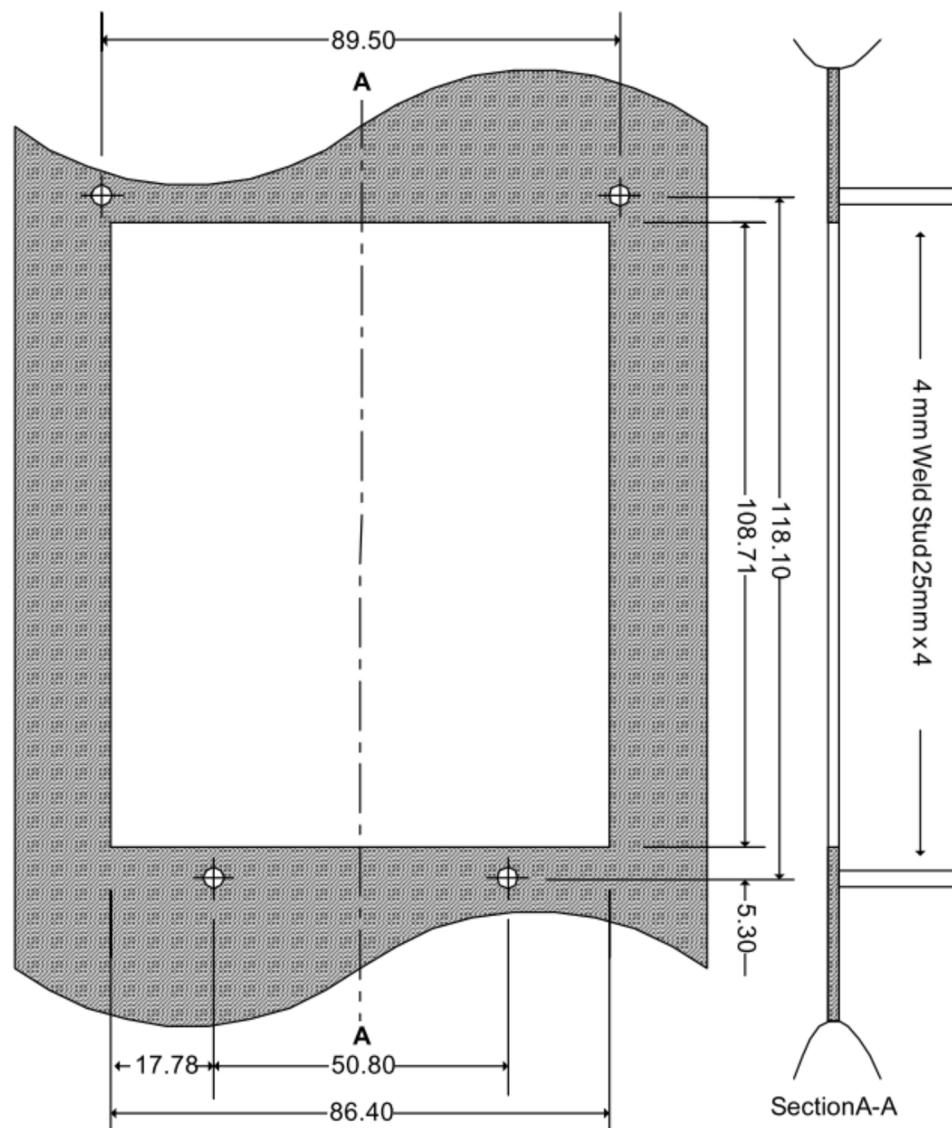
Dimensions of opening and welded studs(mm)
